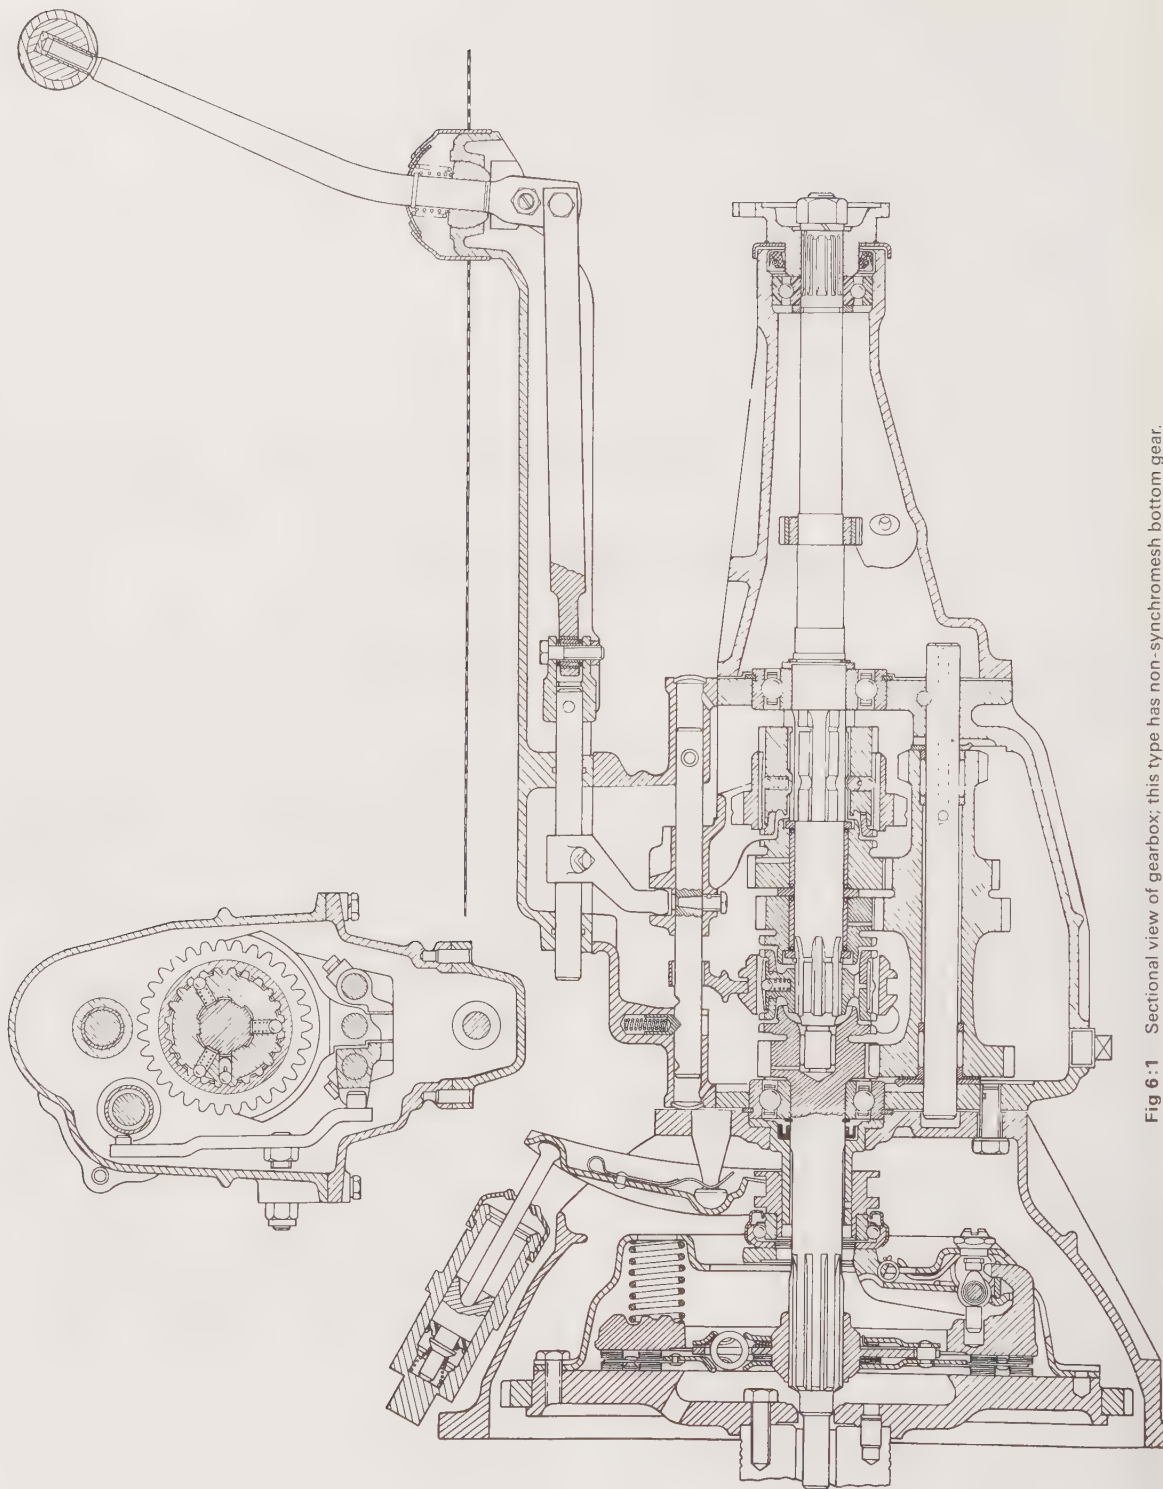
1 Sectional view of gearbox; this type has non-synchromesh bottom gear.
